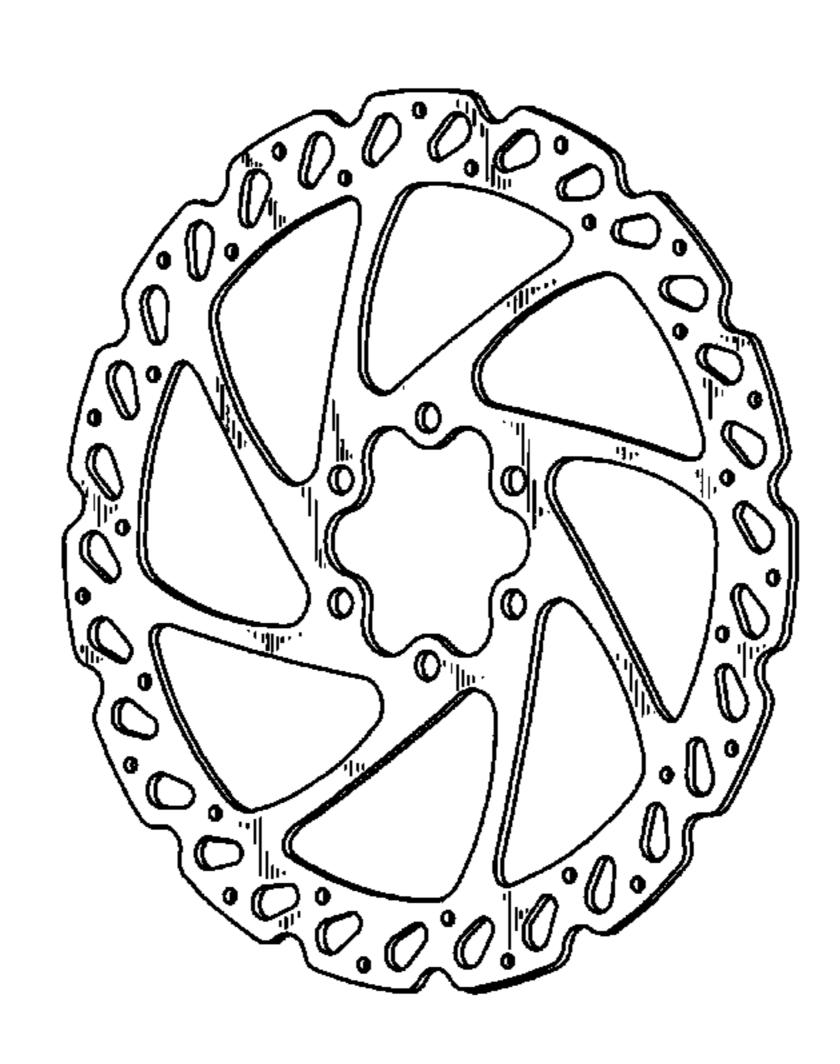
is a front view of FIG. 23, with the rear view being a mirror image;
